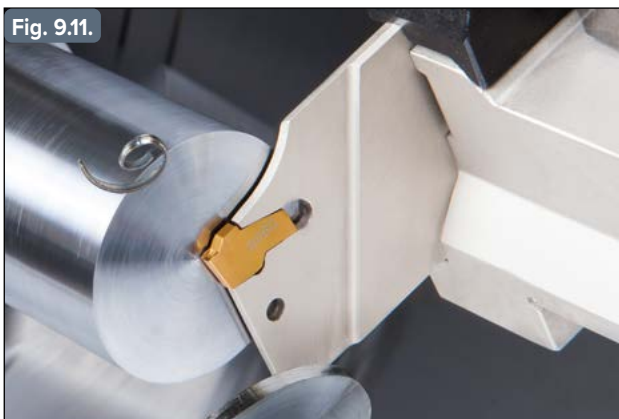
SELF-GRIP parting tool. The insert is fixed in the pocket without mechanical element
